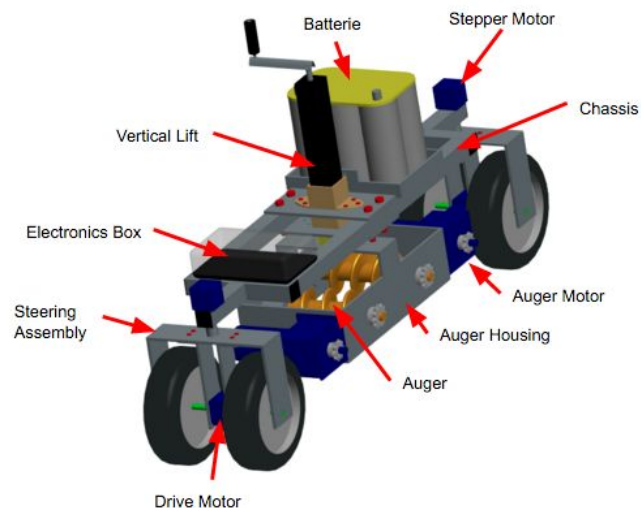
Shearing mechanism with housed auger shearing devices. (length = 40", height = 30", width = 11.5")
